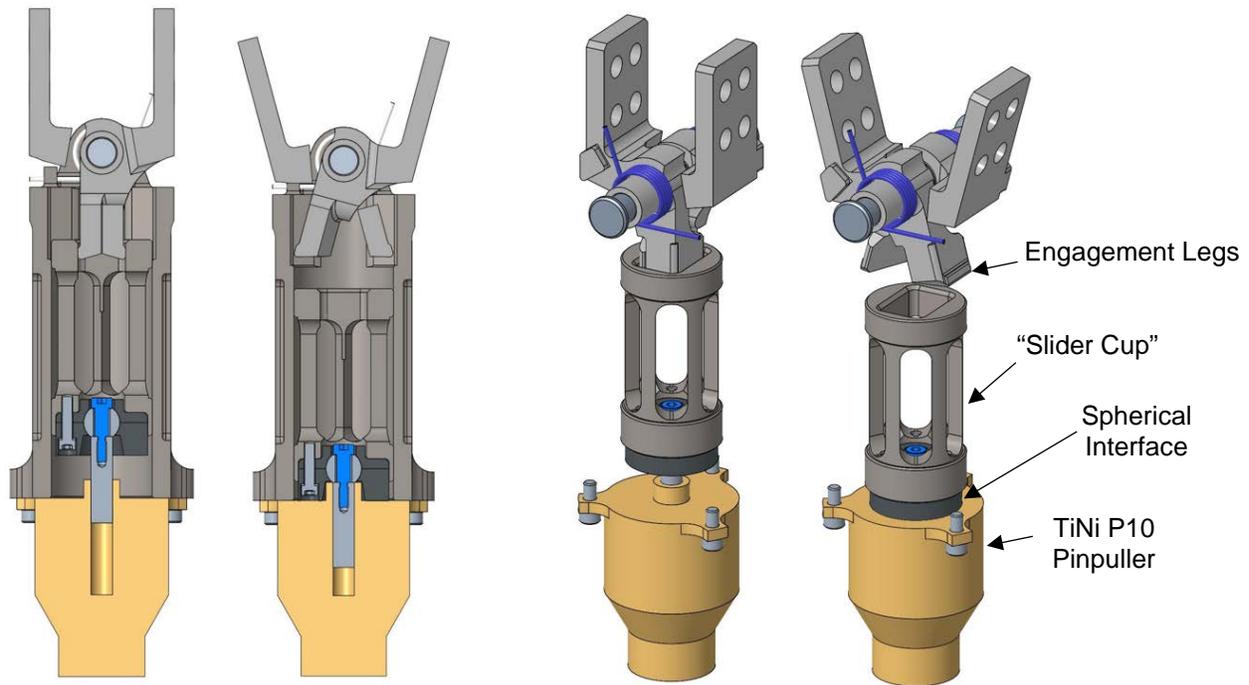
The details of the active clamshell hinge, in stowed and deployed positions.
